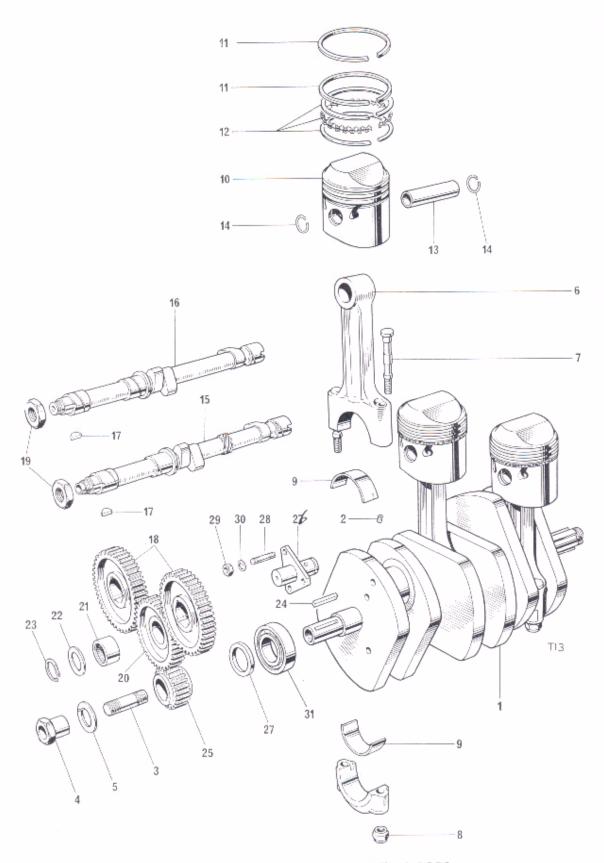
CRANKSHAFT AND CONNECTING RODS
